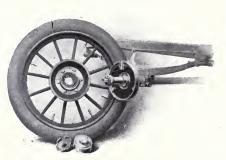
Rear Wheel of Studebaker Model G Car, Showing Hub Drum and Brake. Studebaker Bros. Mfg. Co., South Bend, Ind.
